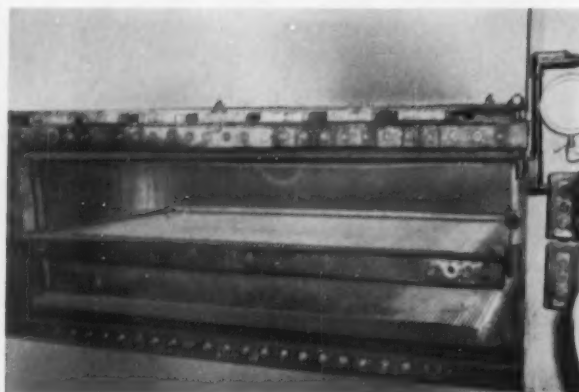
Compression molded filter plate is lifted clear of bottom half of mold
